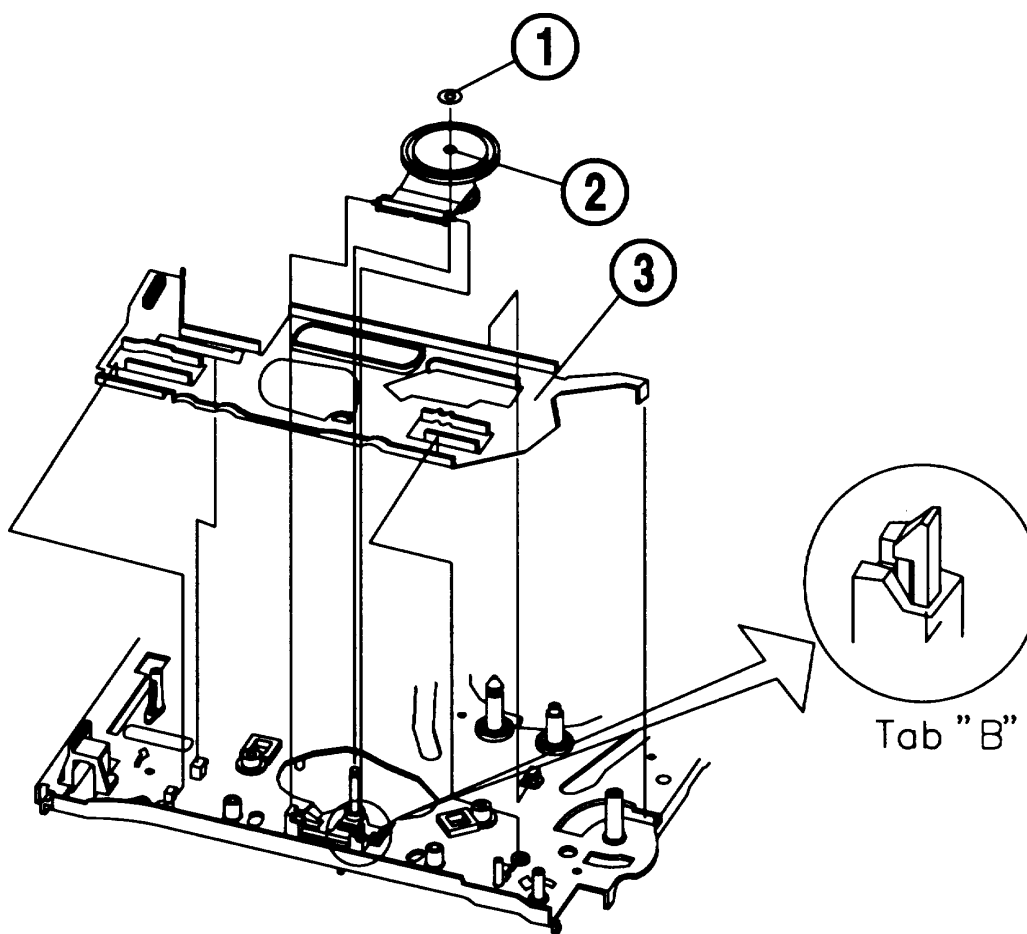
Reel Gear Total Ass'y and Connect Plate Removal
